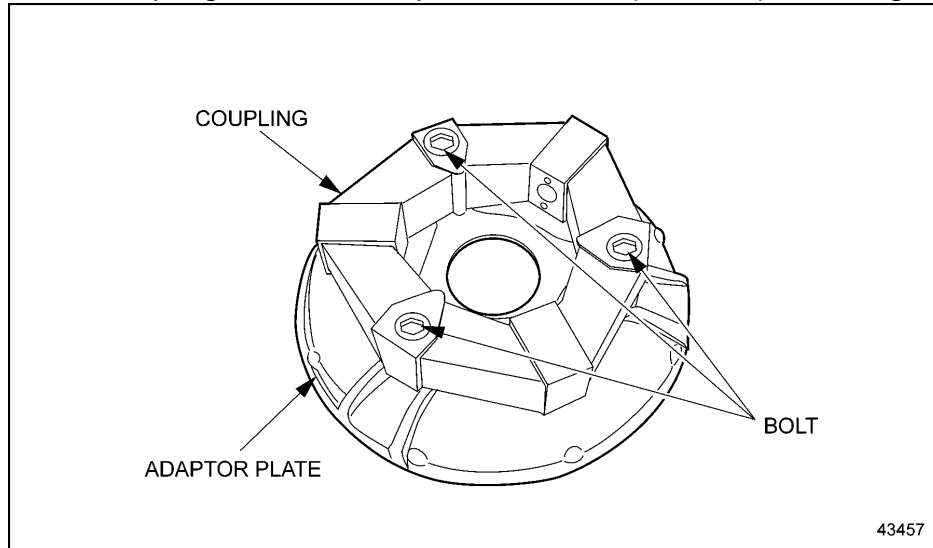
Install Shaft and Torque –Turn to Specifications
